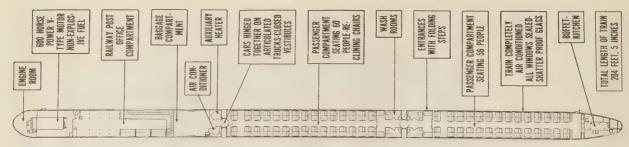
Floor Plan Showing Allotment of Space to Power Plant, Mail, Baggage, Passengers, and Buffet
